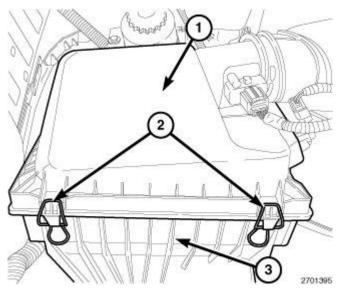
IDENTIFYING AIR CLEANER HOUSING & CLIPS Courtesy of CHRYSLER LLC
